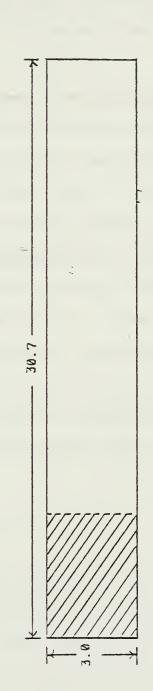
Design of Closure Paddles. Dimensions in cm.
